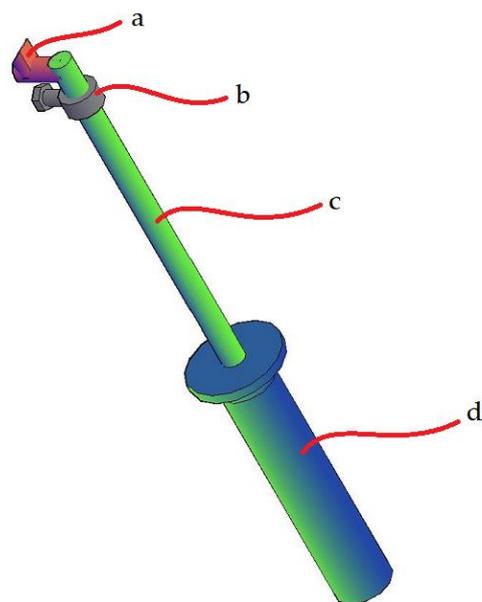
Seal remover: (a) lever, (d) adjusting bolt, (c) lever bar, and (d) handle
